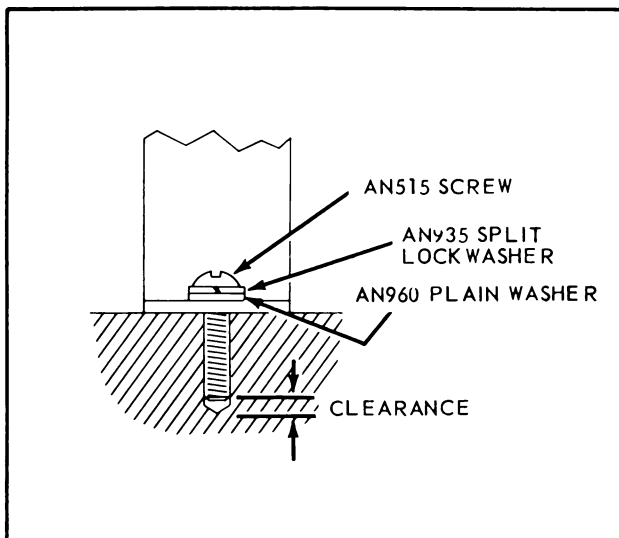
Determining Screw Length for Mounting Into Blind Holes
